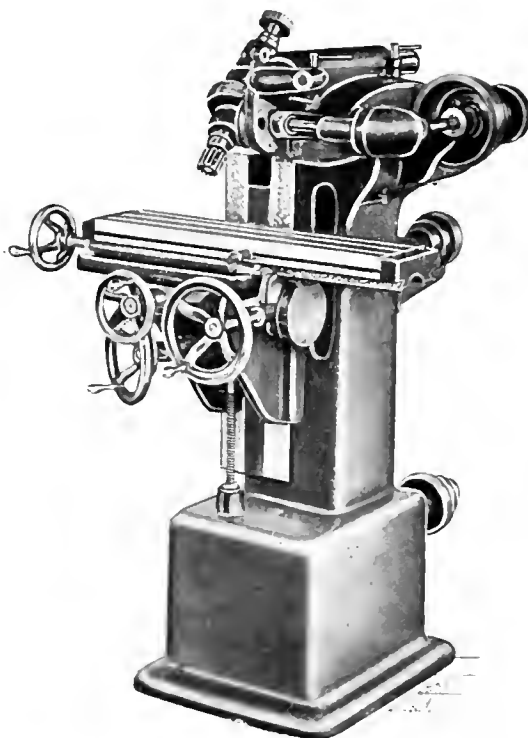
Cutter Spindle Swiveled for Angular Milling.
